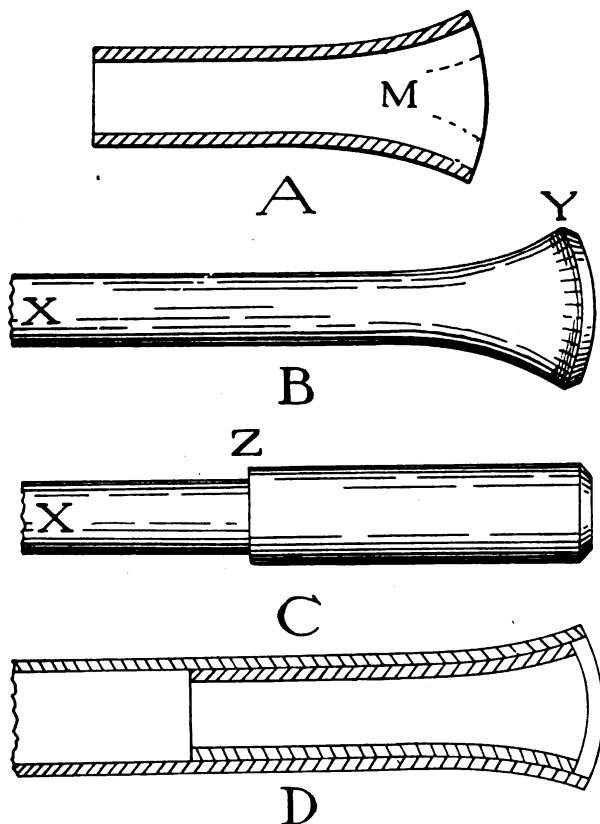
WELDING AND SHAPING THE PARTS FOR SELF TURNING JARS.
